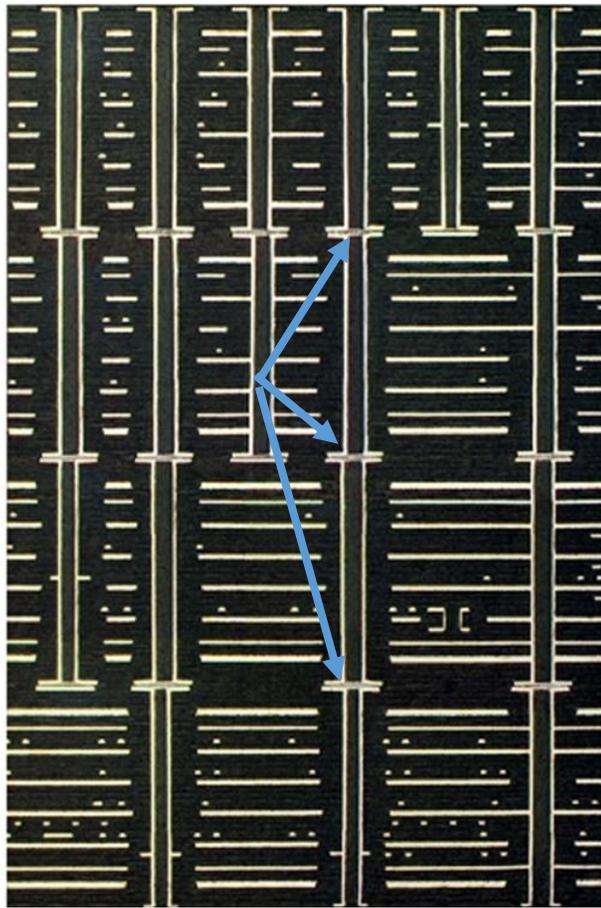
A high-layer-count PCB broken into four cores and joined with sintering paste interposers [3]
